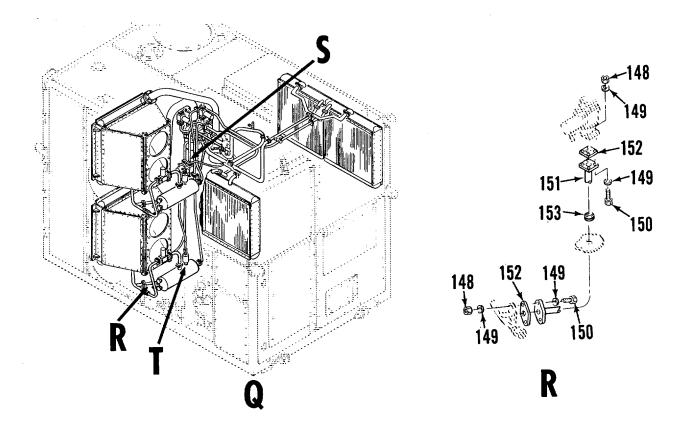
Conditioned air cooling system, exploded view. (sheet 4 of 6)
